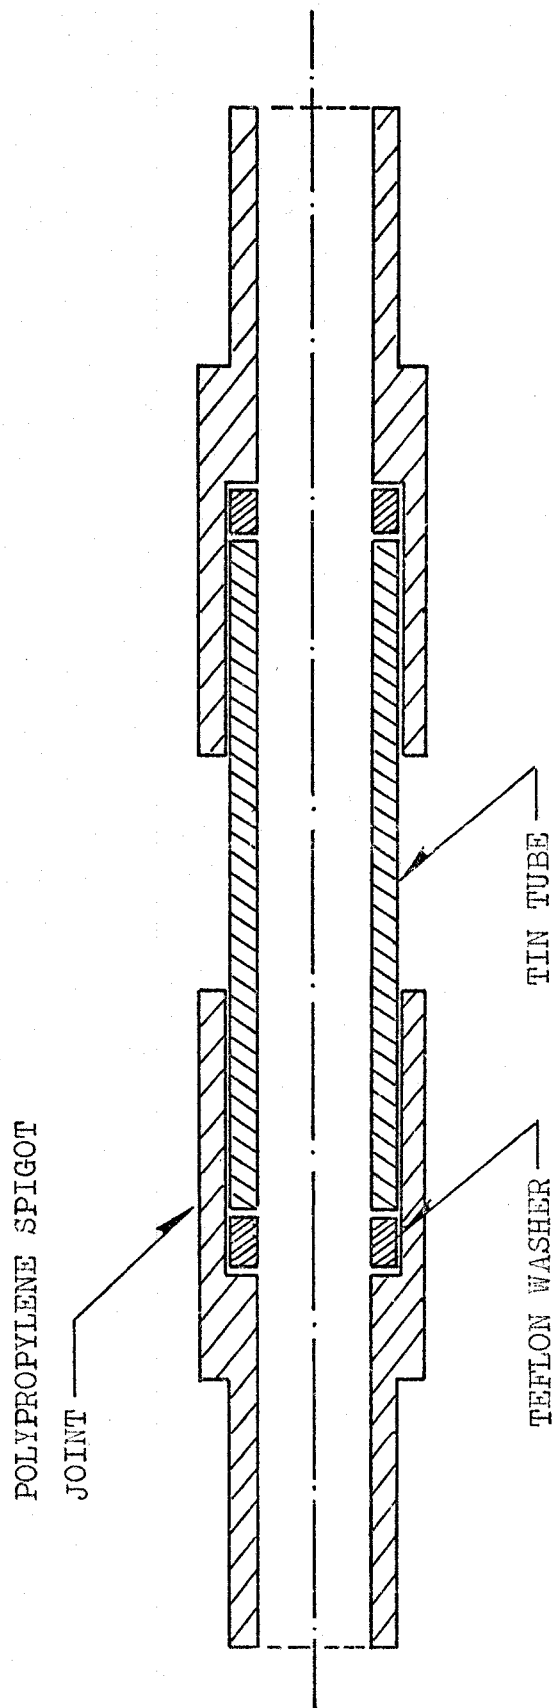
DETAILED DRAWING OF TEST SECTION
